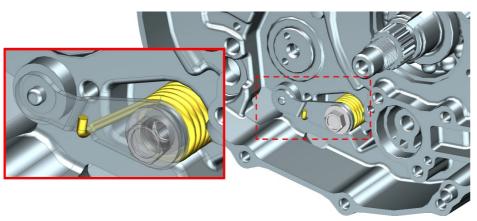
RIGHT CRANKCASE ASSEMBLY ZT158MJ shift mechanism assembly-2		7T158MI shift machanism assambly 2	CHK
